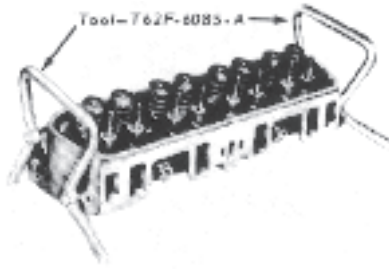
Cylinder Head Holding Fixture 302 and 352-W
